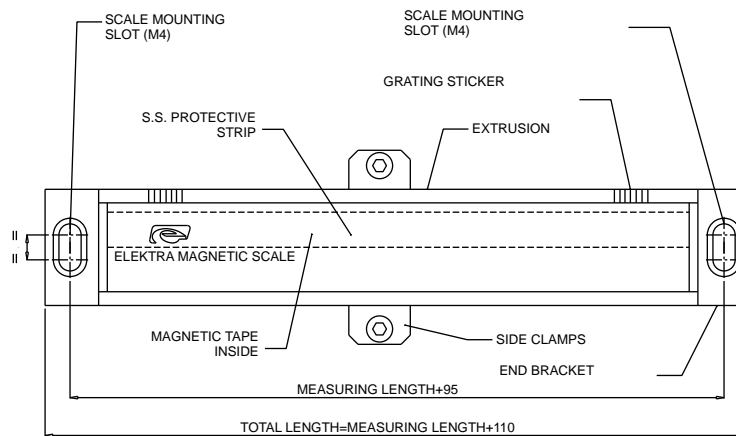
DRAWING FOR EXTRUSION WITH TAPE INSIDE
